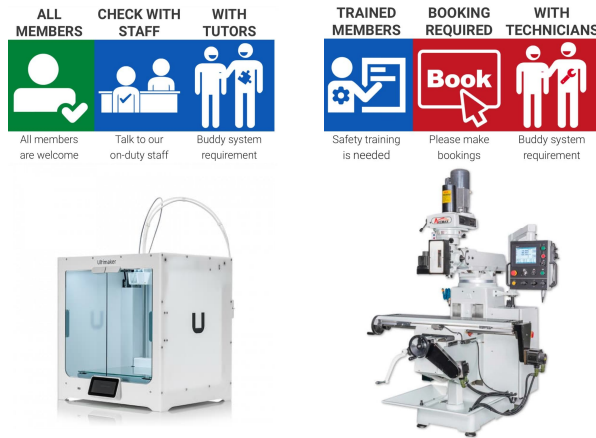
Machine's signages for 3D printers and CNC milling machines.
